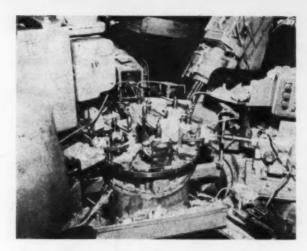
Another multiple drilling setup. At lower right is a fixture, not mounted on dial, for punching 2 holes in casting by air operated slide.
